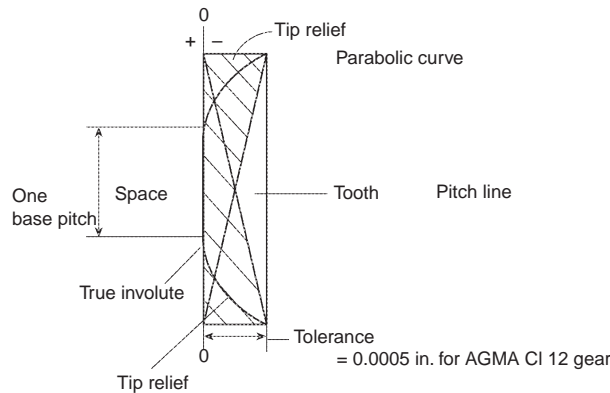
Involute profile for gear speed above 1220 m/min (4000 ft/min)
